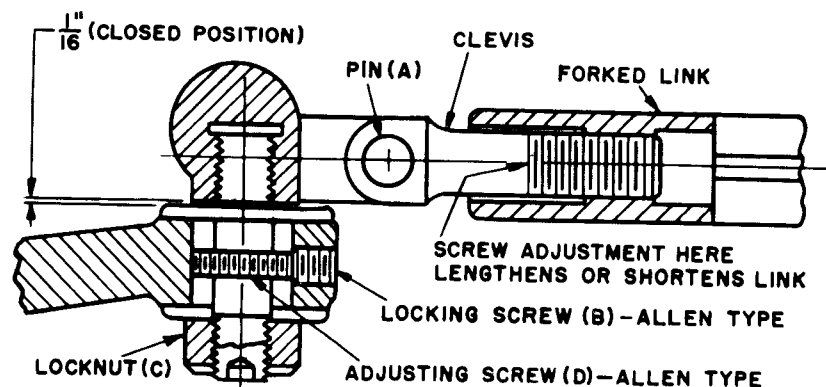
Section of blade operating crank and connecting link screw adjustment
